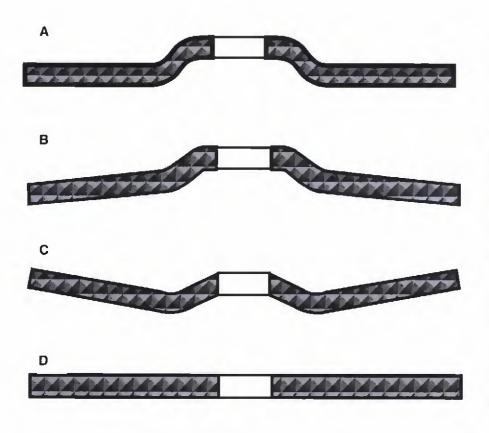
The four types of grinding wheels most commonly used with welding or metalworking, A — Type 27; B — Type 28; C — Type 29; D — Type 1.
